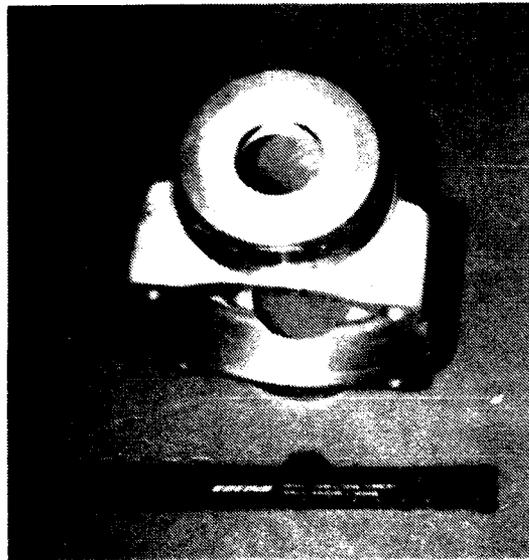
Photograph of the 707 flap drive actuator casting.
